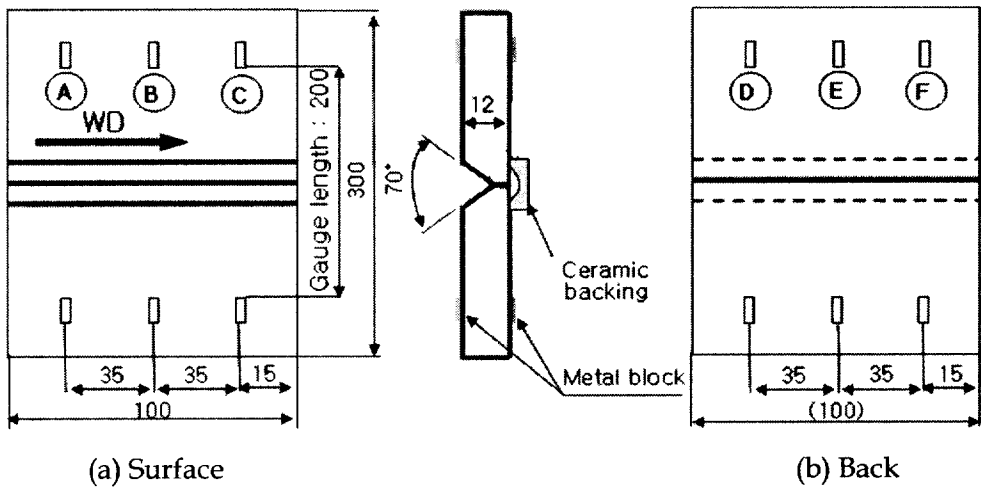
Schematic drawing of experimental setup for the shrinkage measurement
